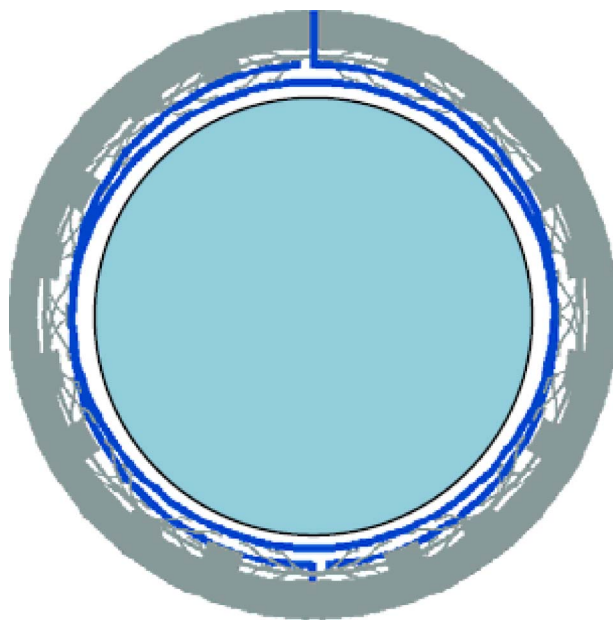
Assembly scheme of mesoscale foil gas bearing
